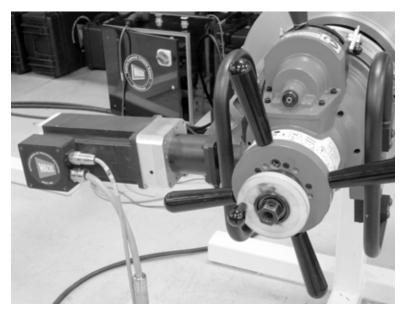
The SDE for the EP 424 uses a straight adapter. The adapter mounts directly to the standard drive mount.
